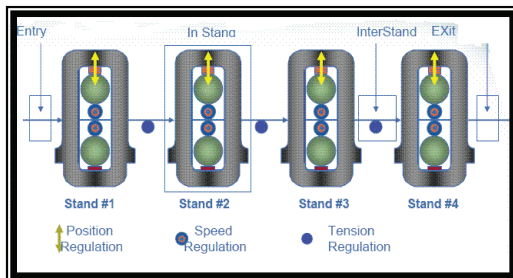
Sketch of a hot wide strip mill consisting of four stands.
